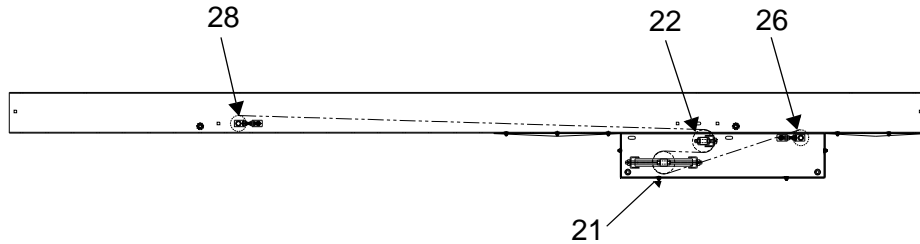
Auxiliary Take-Up Section - Manual (3.5" Pulleys)
